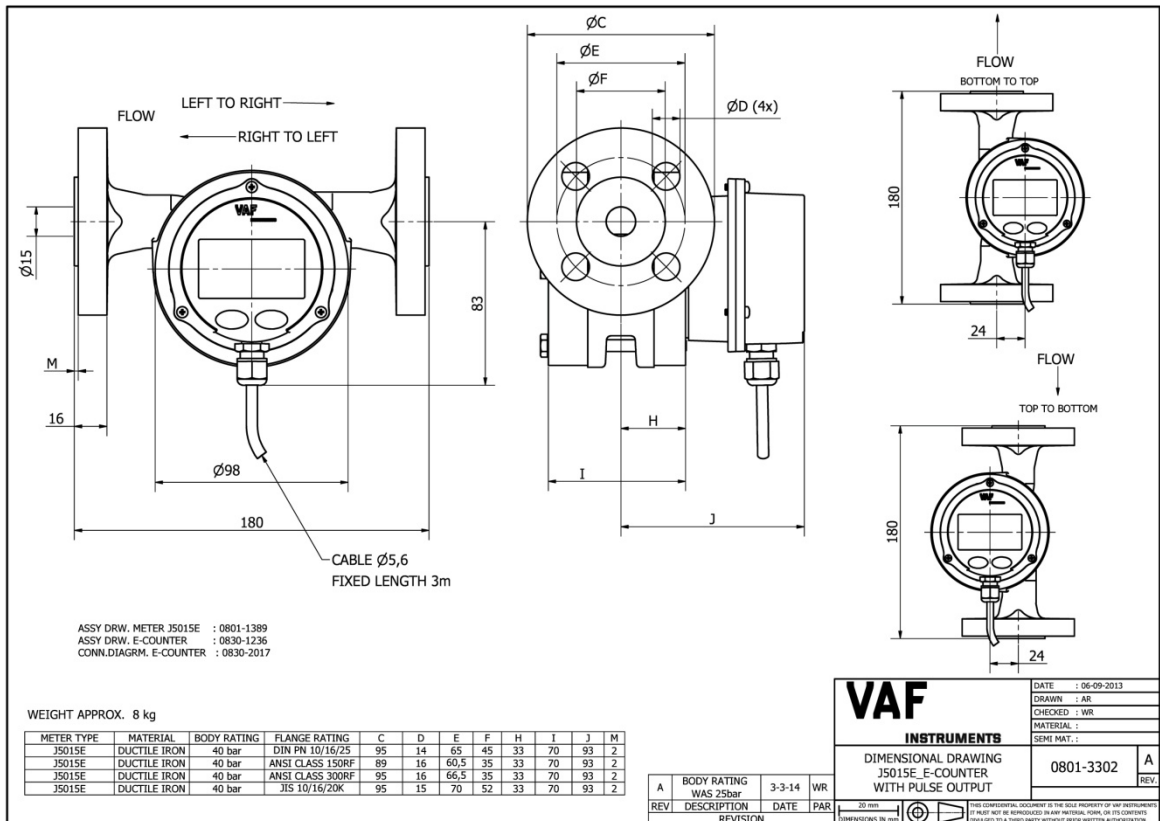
Drawing 0801-3302 – Dimensional drawing J5015E E-counter with pulse output
